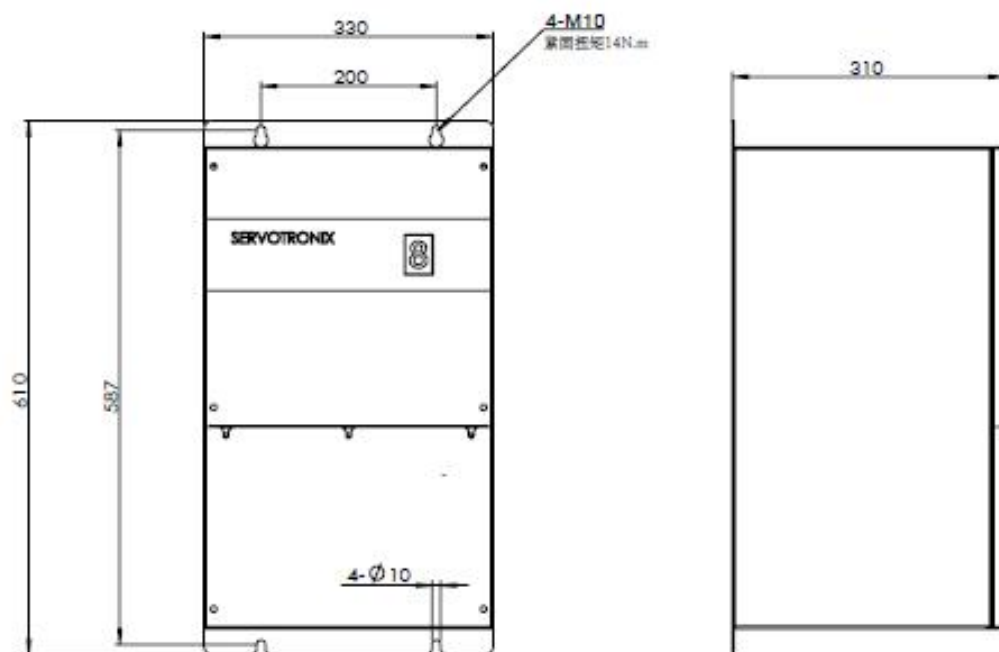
CDHD2S-060 (high-voltage) - dimensions (mm)
